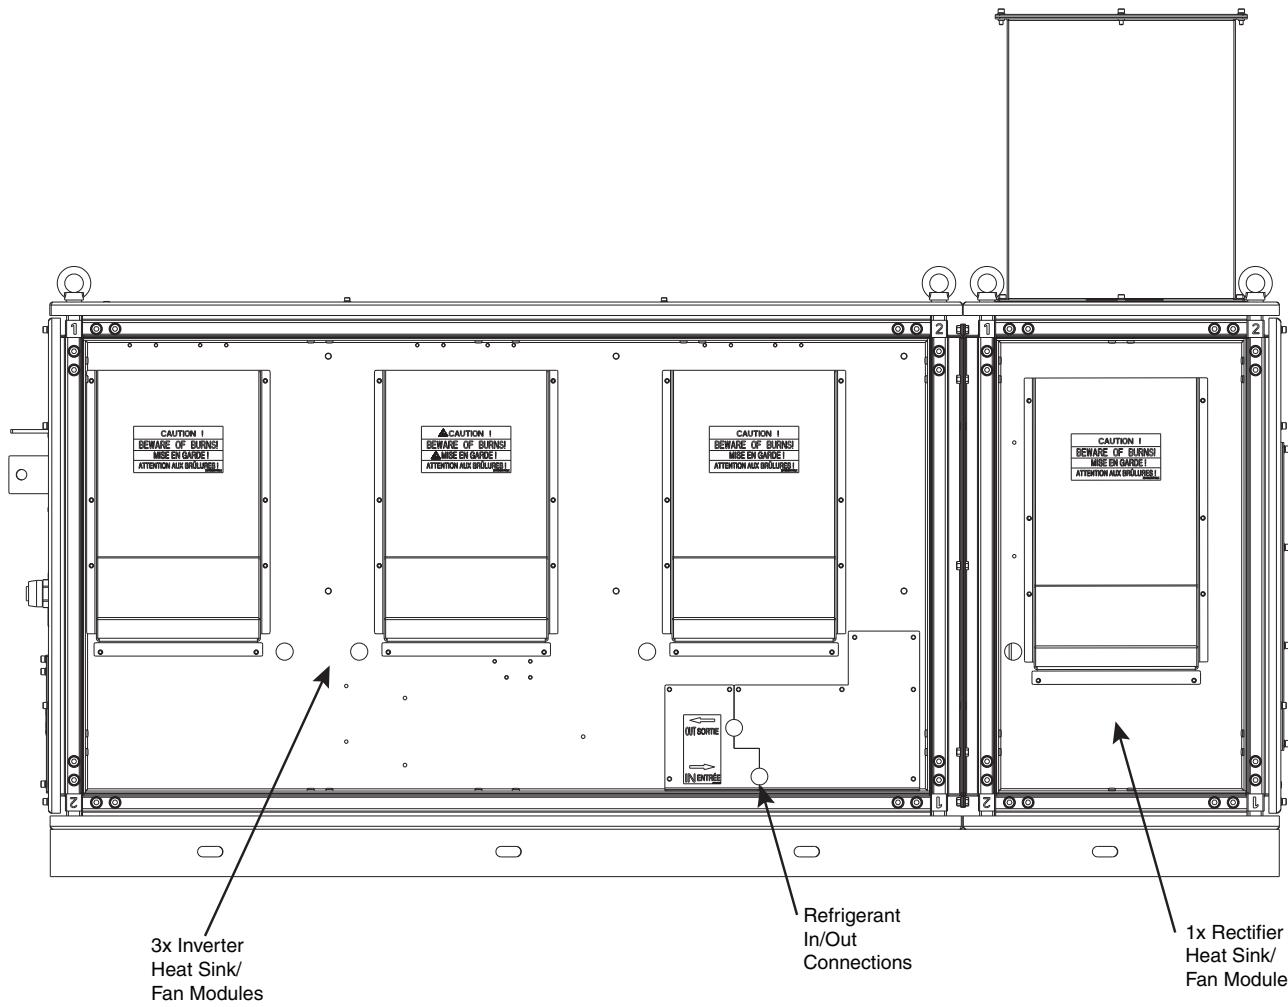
680 Amp VFD Assembly Showing Electrical Pull Box
